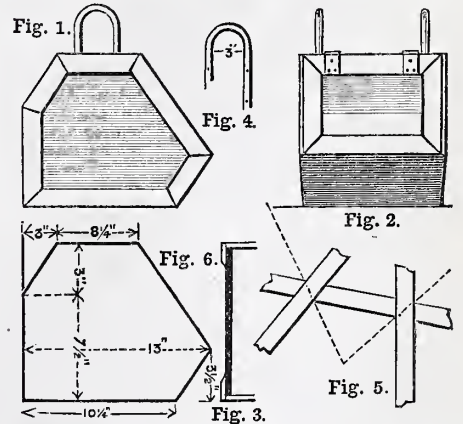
Side Elevation. Fig. 2.—Front View. Fig. 3.—Section showing Rebate formed by Moulding. Fig. 4.—Handles, 1/2 Round Iron. Fig. 5.—Mode of Marking Mitre. Fig. 6.—Size to cut out sides; all measures from back and bottom line as shown, 3/8 or 1/2 thick.
